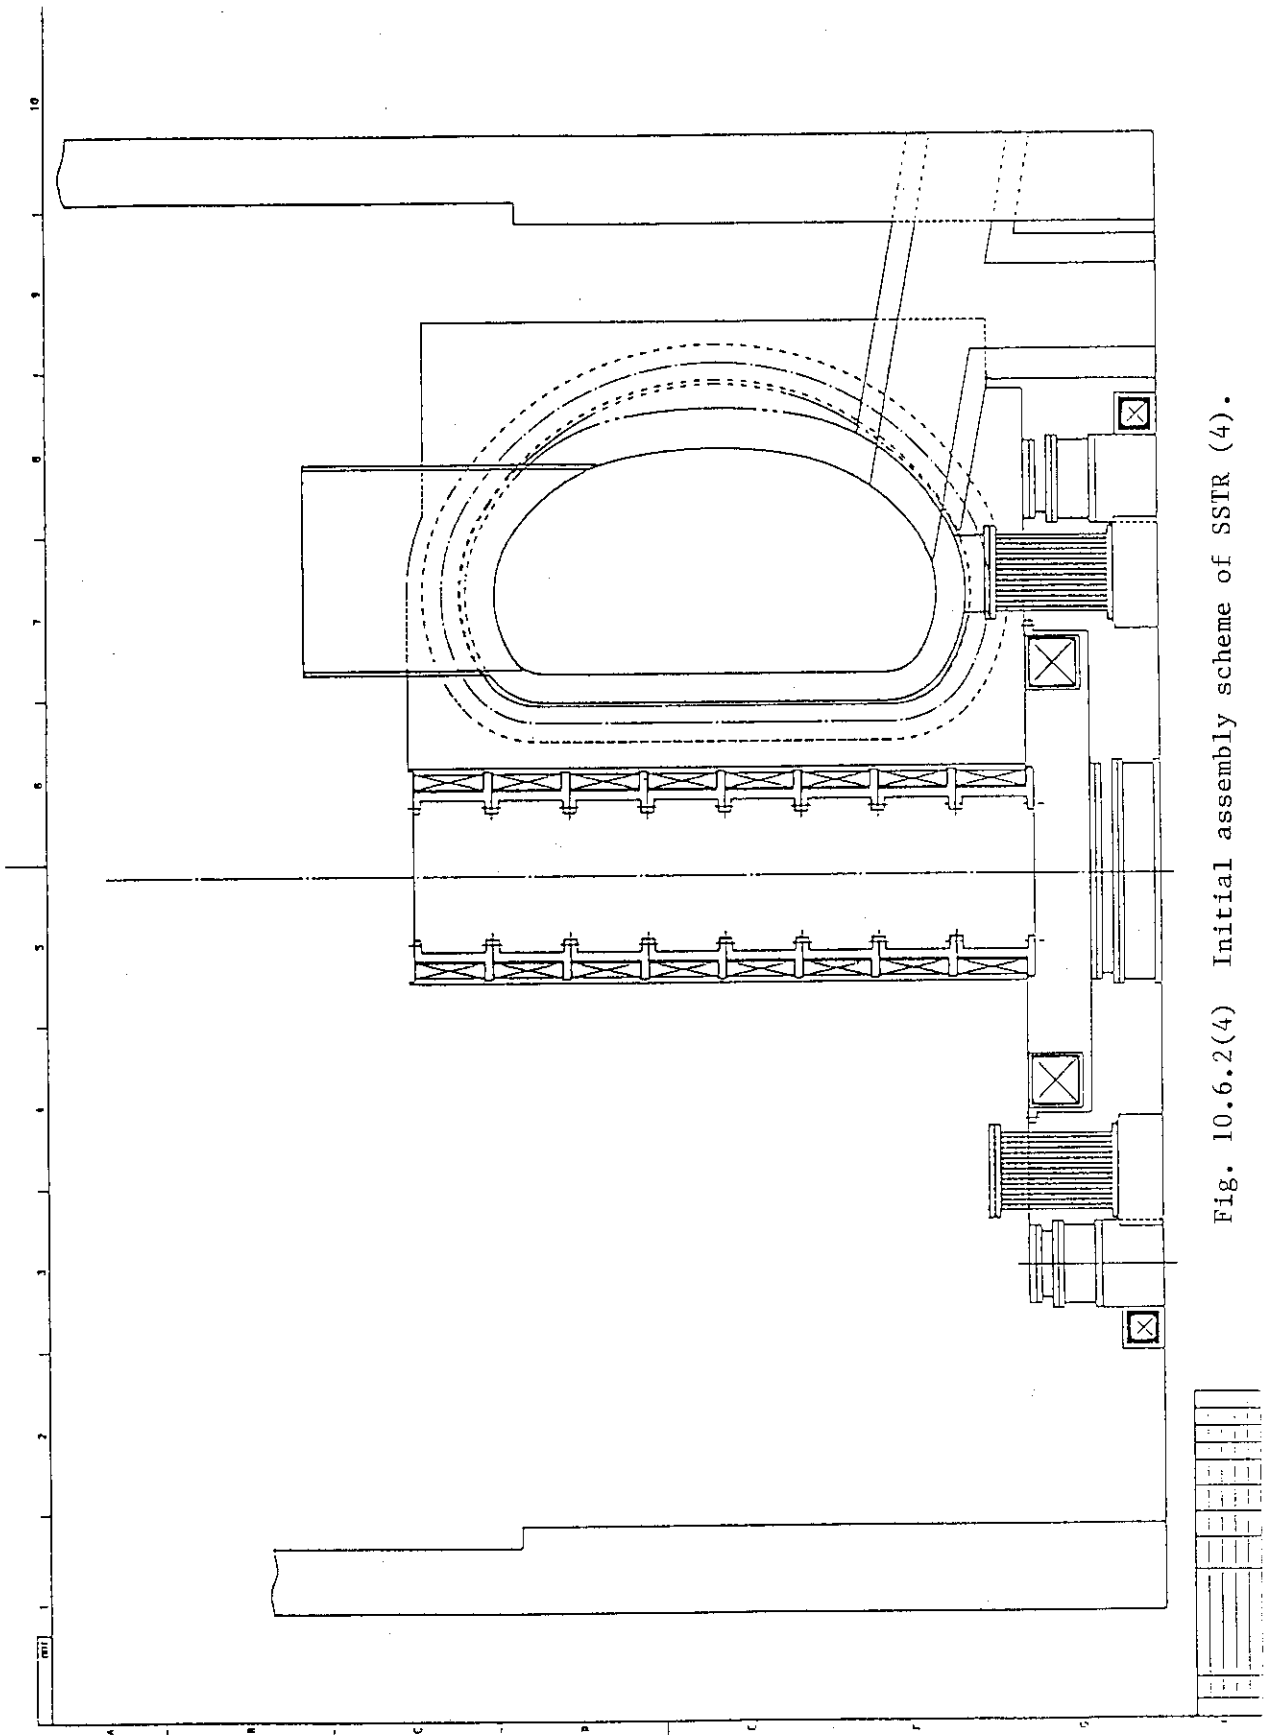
(4) Initial assembly scheme of SSTR (4).
